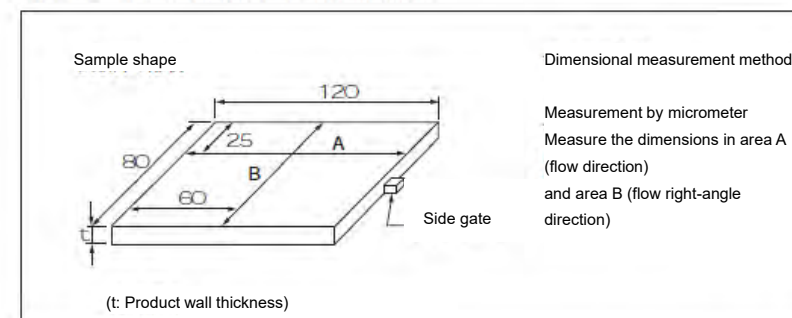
Dimensional stability (1) (range of dimensional fluctuations after molding)
